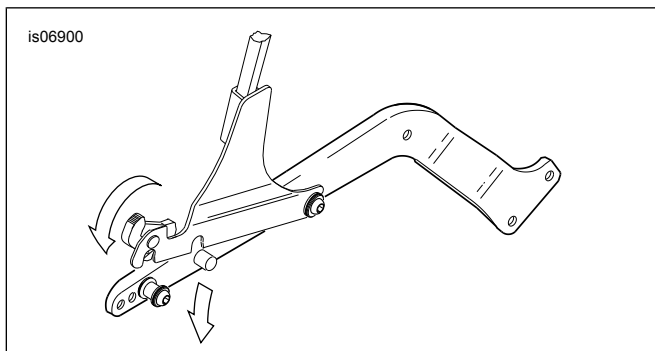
Pull back rotary latches and lower side plate onto rear docking points.
